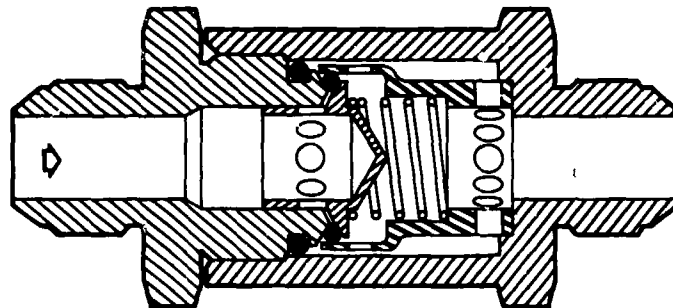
Poppet-Type Check Valve With an O-ring Seal
